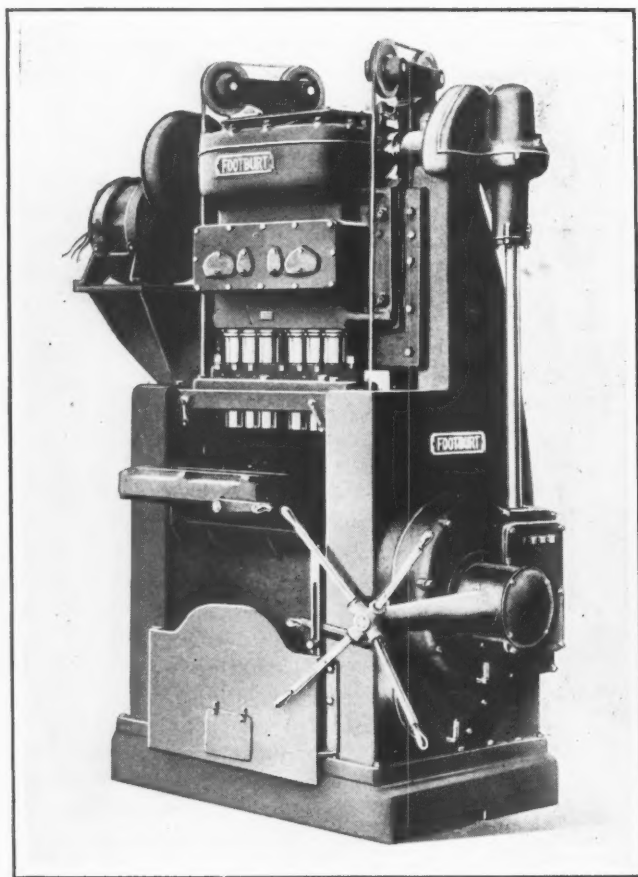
Foote-Burt Multiple-spindle Boring Machine
